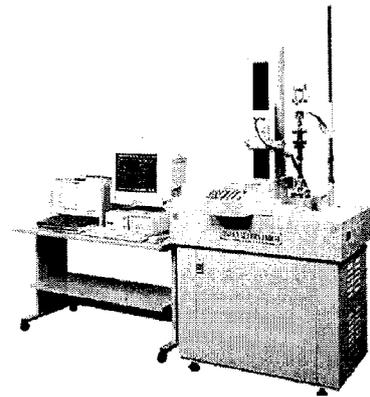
Bevel gear measurement machine(Osaka Seimitsu Kiko, CLP-35)
